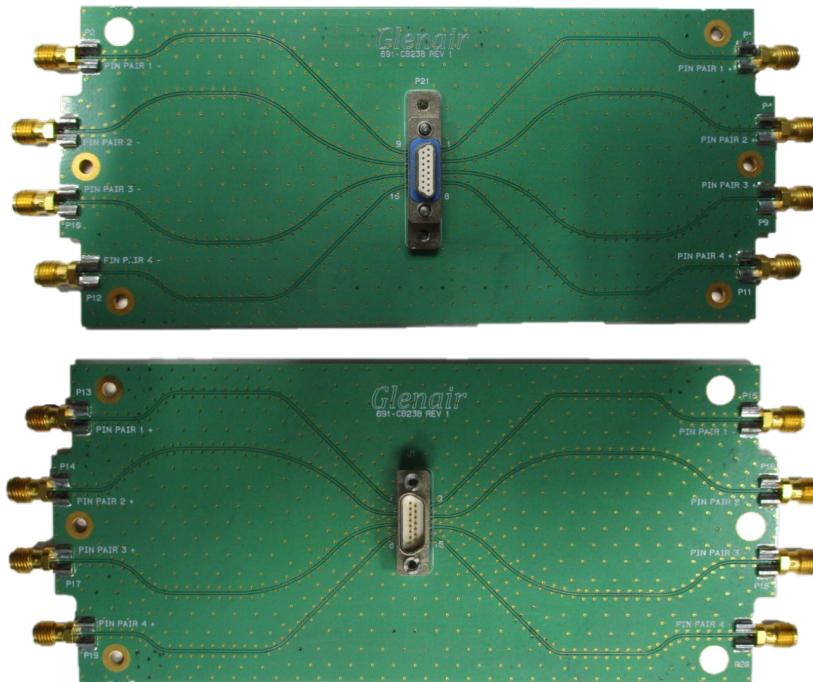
Straight PC Tail GHSM-BSS Pin and Socket Test PCB's
